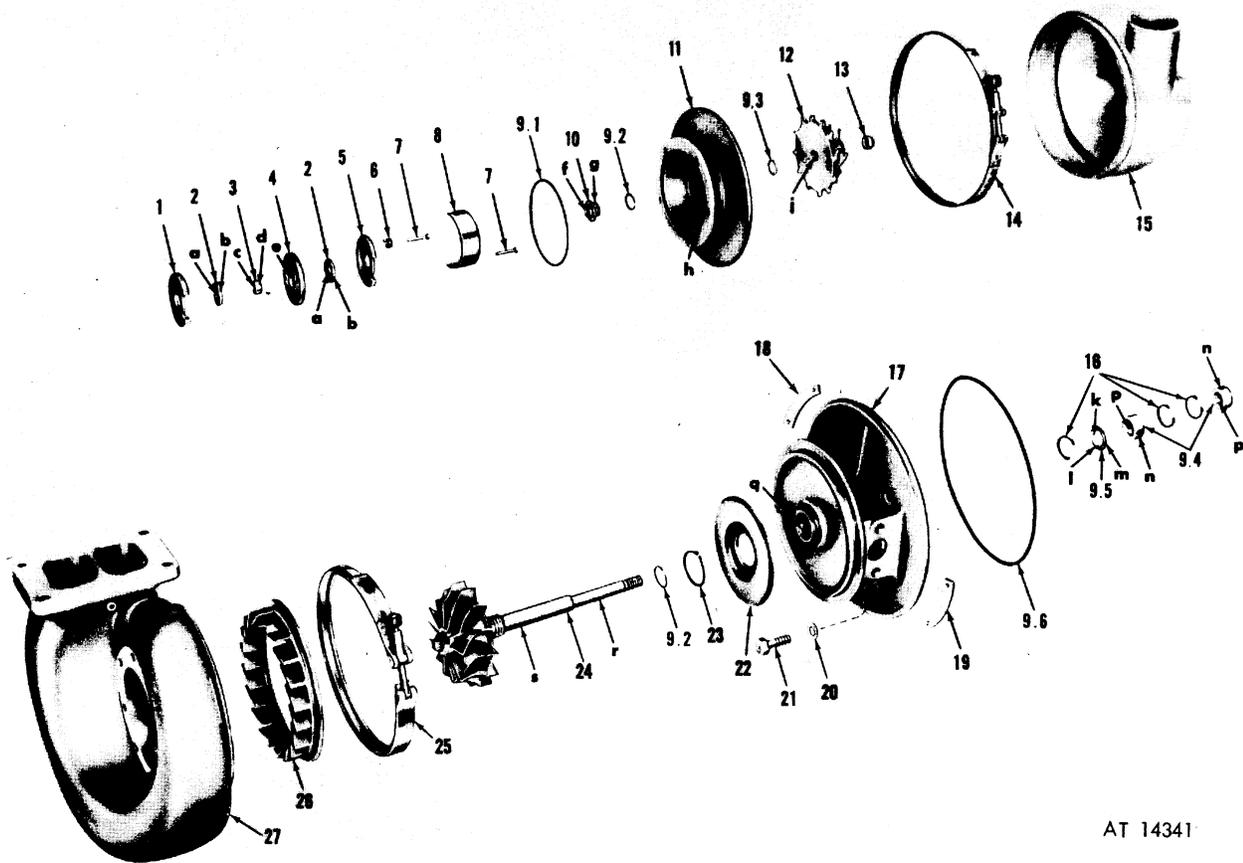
Turbocharger assembly 10935279 (4-456) — exploded view.
